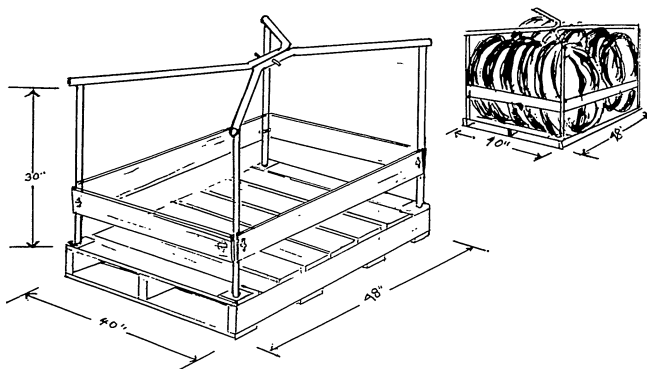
Here is an example of a wooden frame containment side used with Tier-Rack for storage of coils of steel wire. The frames and sides are completely removable from the standard pallet.
